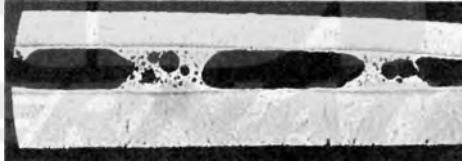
Voids resulting from lack of fill between the faying surfaces of a lap joint between two sheets of Hastelloy X brazed with BNi-1 filler metal. Unetched. 16.5 \times . Source: Ref 1
